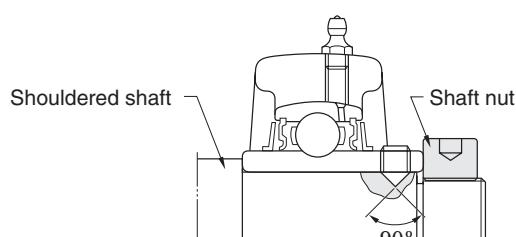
Example of installation with a shouldered shaft and shaft nut
